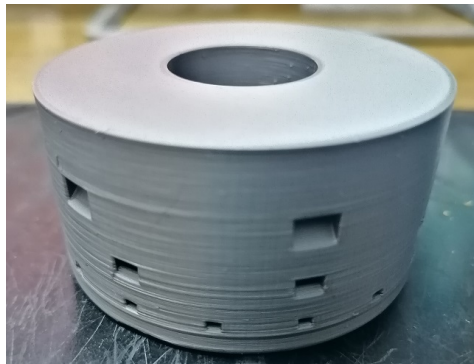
Manufactured first prototype by the SLM (selective laser melting) 3D Metal Printing process
